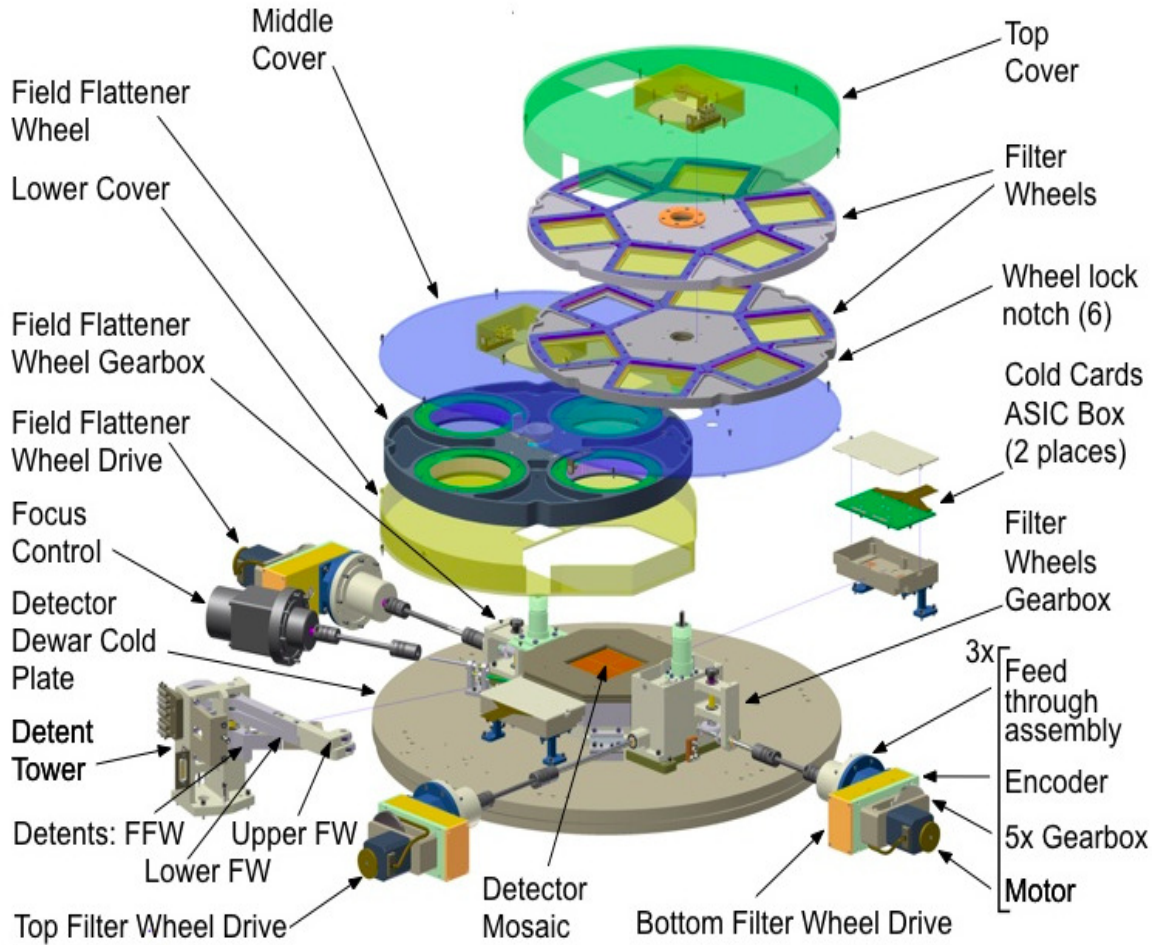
Detector dewar cold plate with detector module and wheels gearboxes attached, plus exploded view of the components. The detent tower holds three arms with ball bearings at each end. FFW indicates the Field Flattener Wheel. The bearing outer races roll into the 6 notches visible around the circumference of each wheel. The ASIC boxes are shown in both an exploded view and in a closed view.
